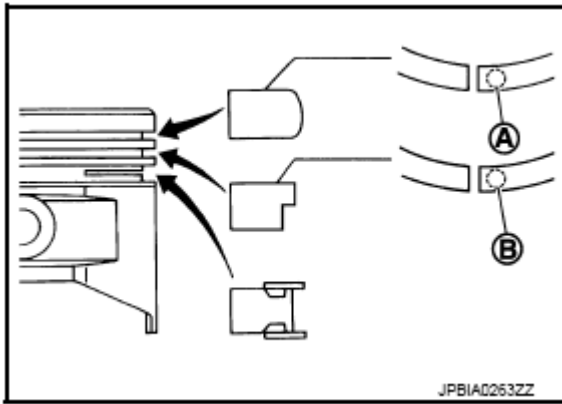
Identifying Stamped Marks On Top And Second Ring
